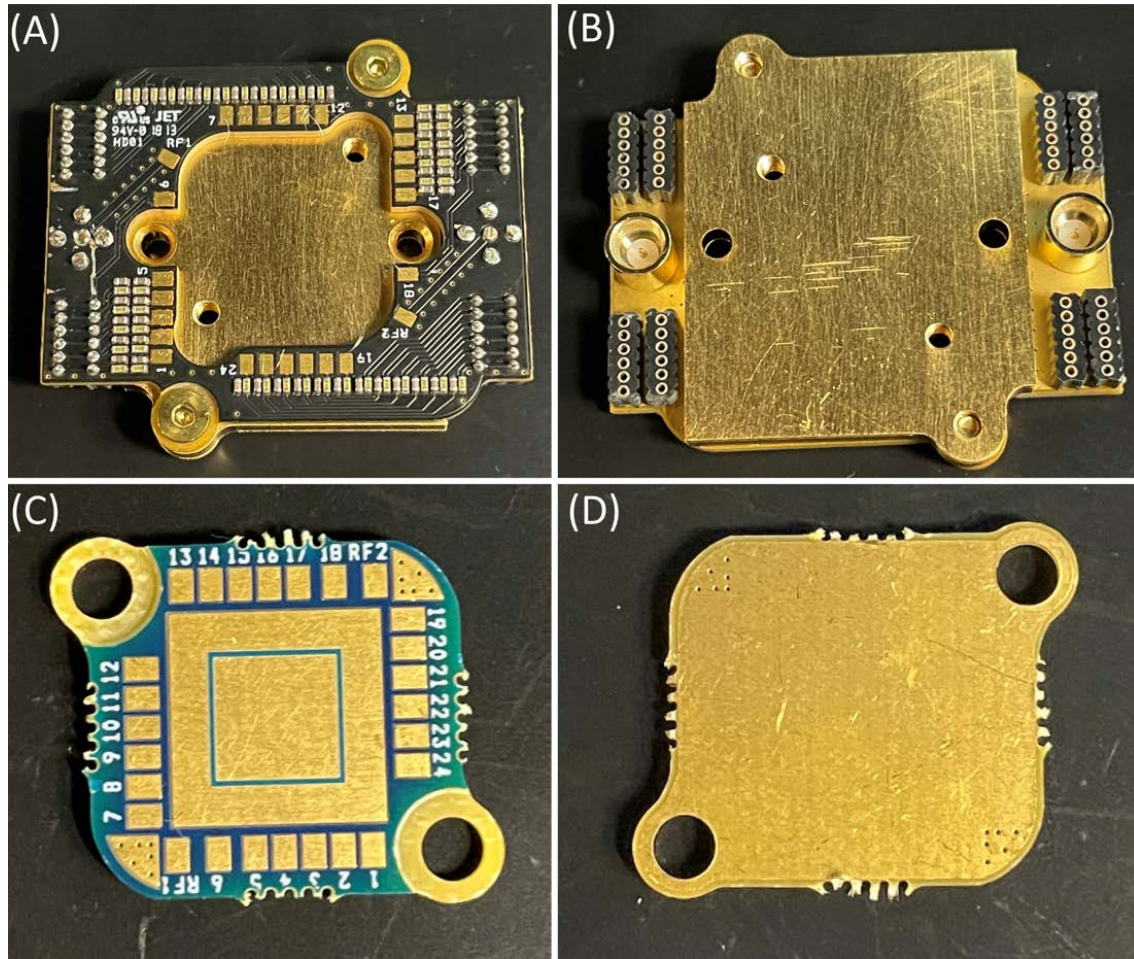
The chip carriers and sample carriages were manufactured from the schematics illustrated in Fig. C.1. (A,B) Top and bottom of the carriage board installed on the thermal contact (gold-plated copper). On the back of the carriage, the 1 mm pitch SIP connectors are accessible as well as two SMP connectors for high frequency applications. (C,D) Top and bottom of the chip carrier. 5 mm x 5 mm soldermask outline in the center is only for guidance for where the Attocube positioners can move. It does not isolate the gold-plated copper in the center from the outside; i.e. silver pasted contacts to the center can be connected via wire bonds to the outer metal.
